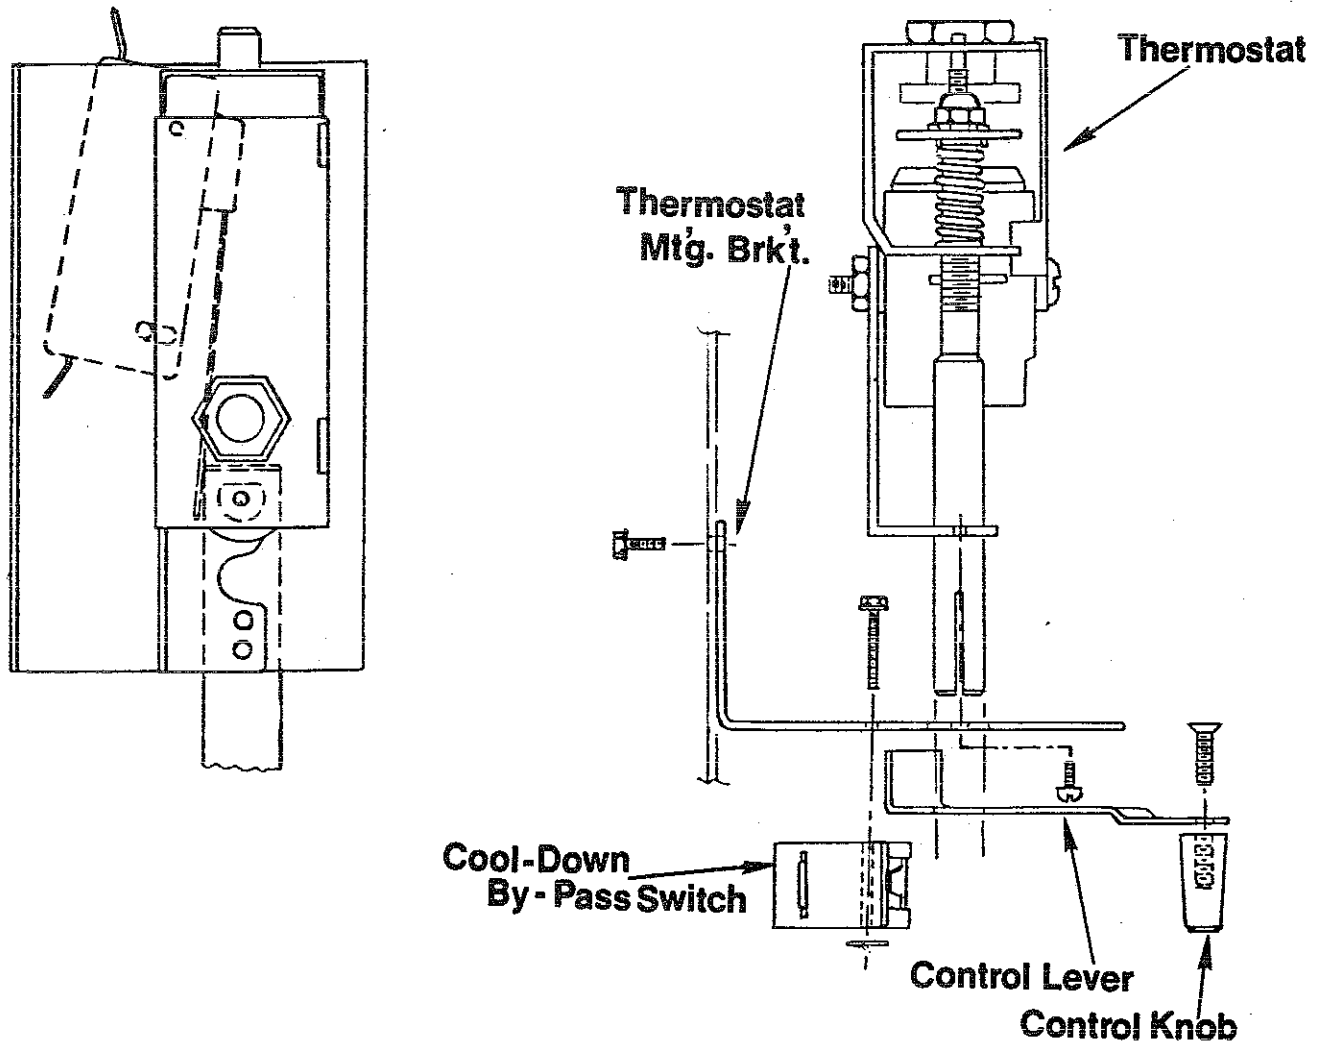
Control Thermostat and Cool Down By-Pass Switch
